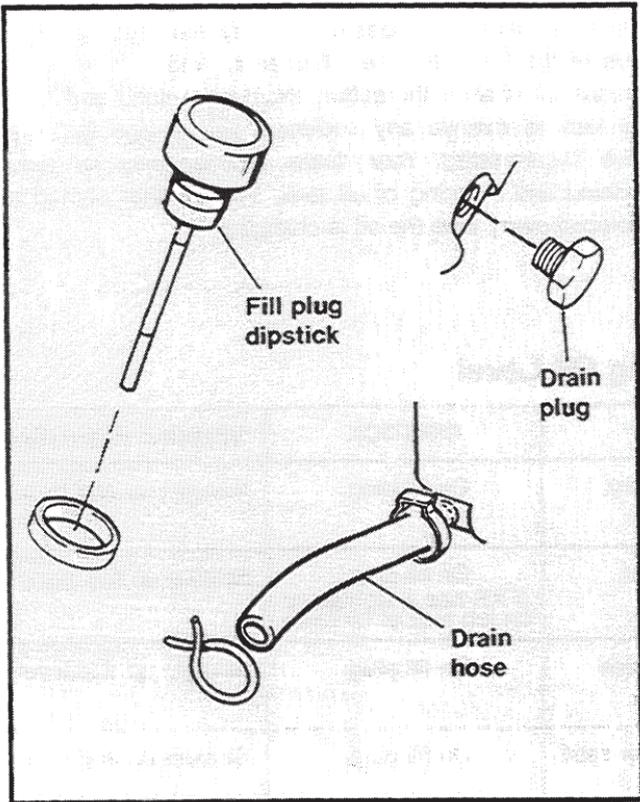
Fill Plug Dipstick & Oil Tank Drains
